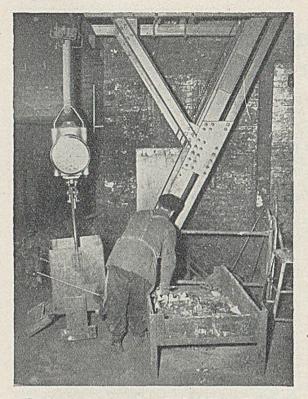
Lower End of the Inclined Hoist Charging Machine for the Cupolas. The Separate Weighhopper is Suspended from a Monorail, the Suspension incorporating a Dial-type Spring Balance. Above the Head of the Operator, the Charge Skip is shown en route for the Cupola.
